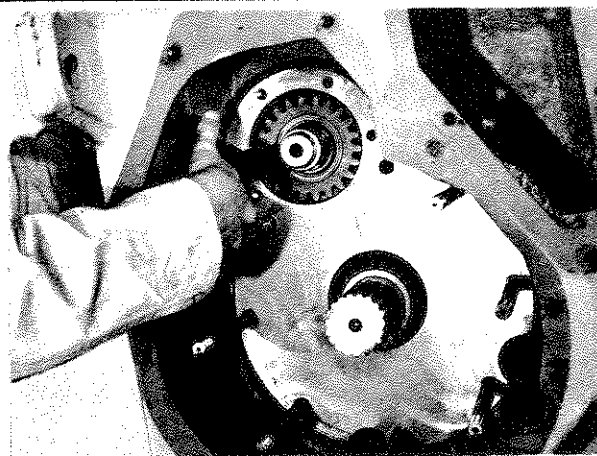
Removal And Disassembly Of Bevel Gear Shaft Assembly (Sheet 1 of 3)
